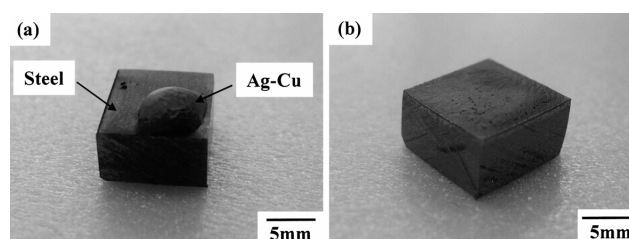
External views of Ag–Cu filler alloy on stainless steel heated at 1173 K for 3.6 ks in a vacuum. (a) Non-coated specimen. (b) Coated specimen.
